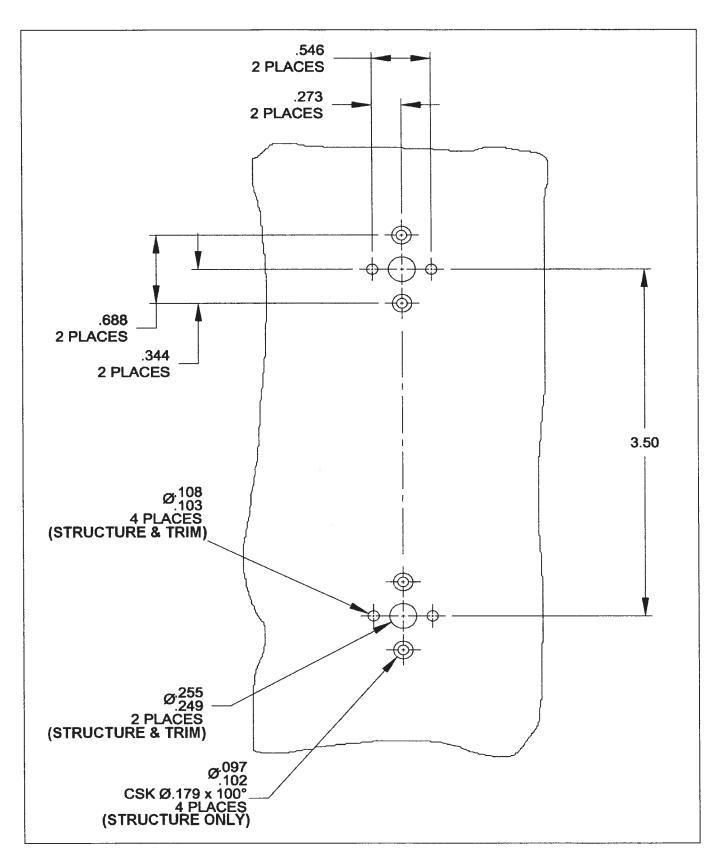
EGRESS TOOL MOUNTING HOLE PATTERN
